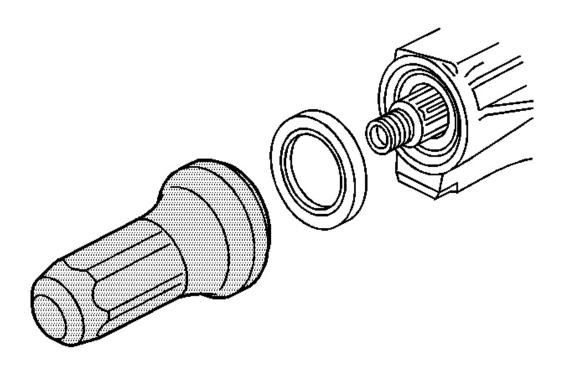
Installing Pinion Oil Seal Courtesy of GENERAL MOTORS CORP.
